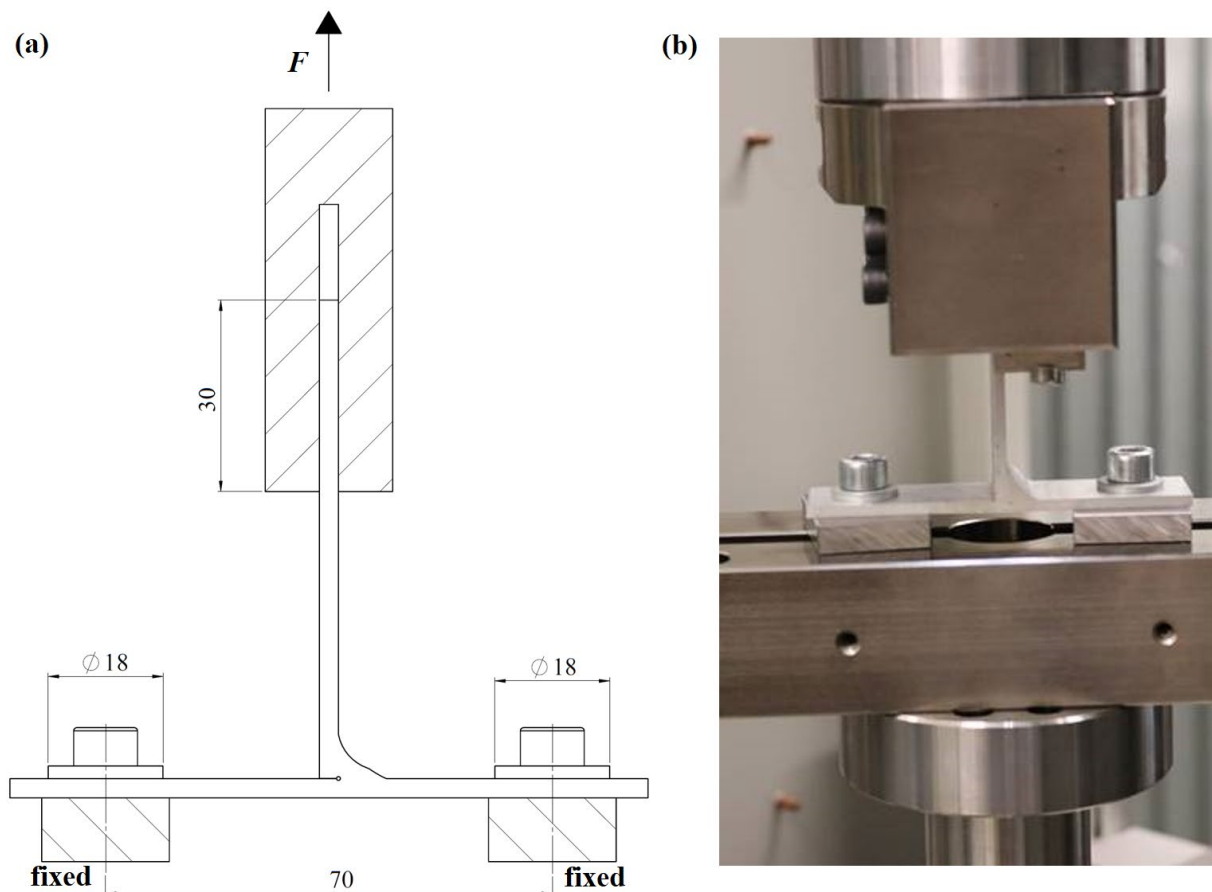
T-joint specimen HCF tension: (a) testing setup, (b) specimen in the device
